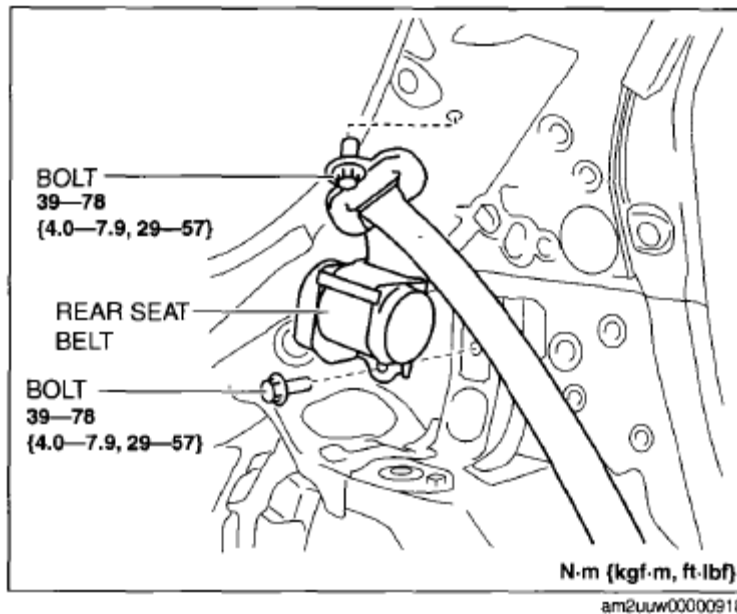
Identifying Rear Seat Belt And Bolt With Torque Specifications
